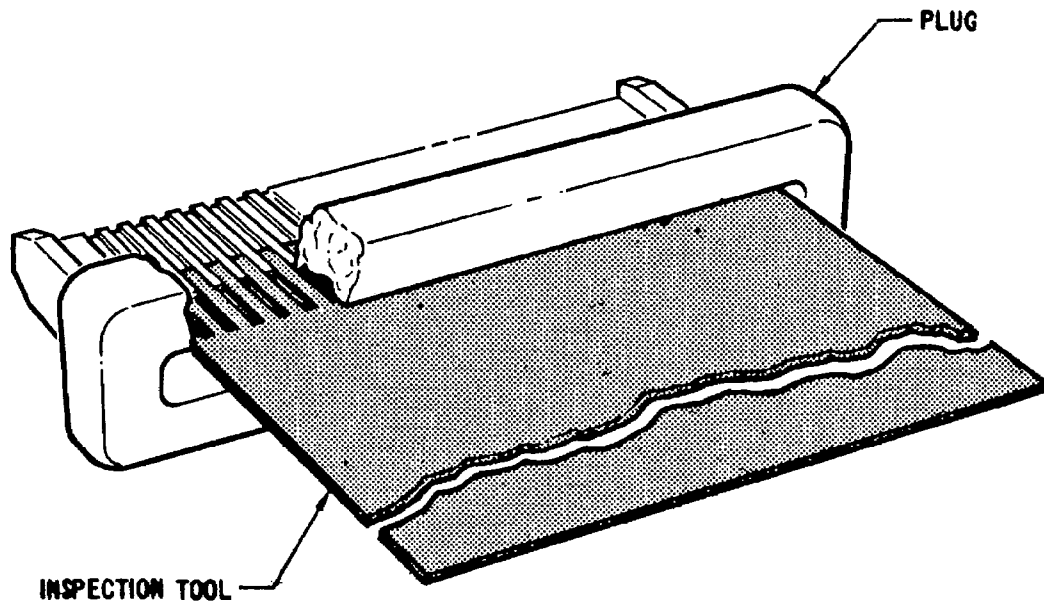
Plug window dimensional inspection tool and flash remover.
